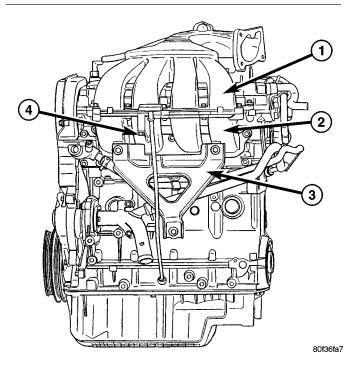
Lower Intake Manifold Support Bracket - 2.4L Turbo
